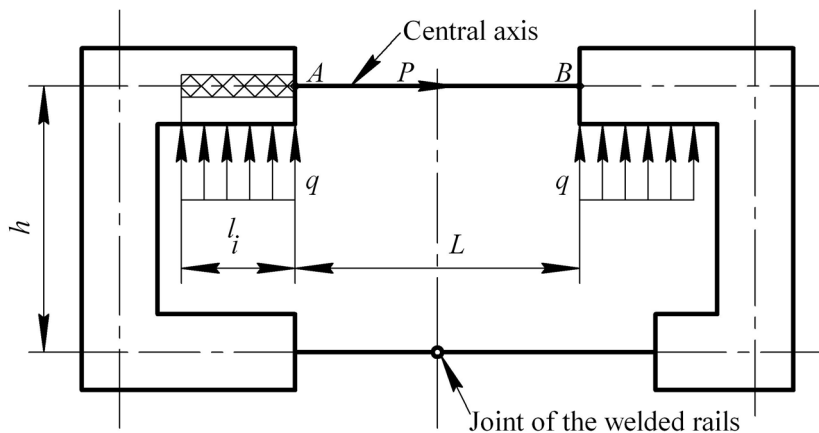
The calculation scheme of machine loading during the welding
